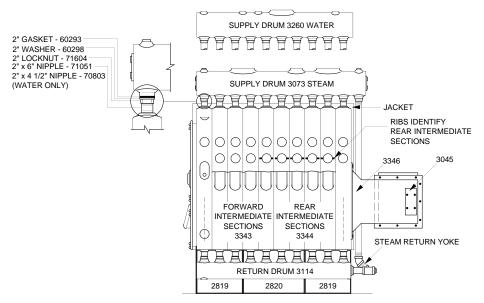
SIDE VIEW - NATURAL DRAFT (10 SECTION BOILER ILLUSTRATED)
